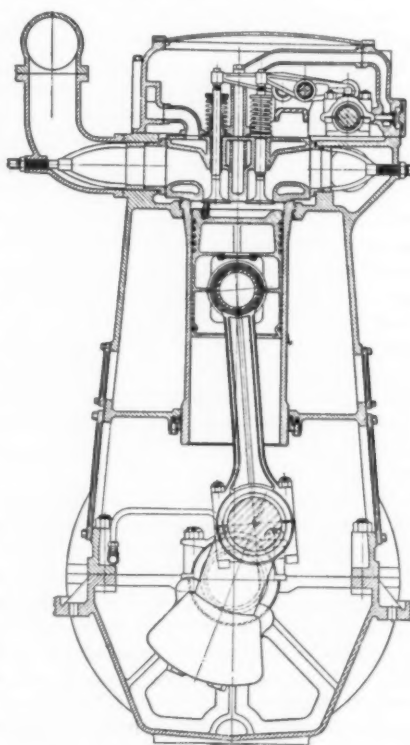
CROSS-SECTION OF A SINGLE CYLINDER OF THE FOOS HIGH-SPEED DIESEL ENGINE
